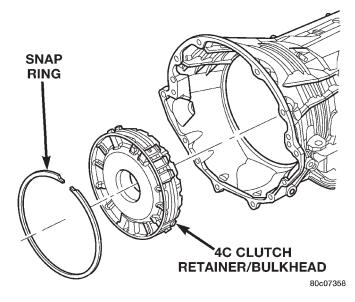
Remove 4C Clutch Retainer/Bulkhead
